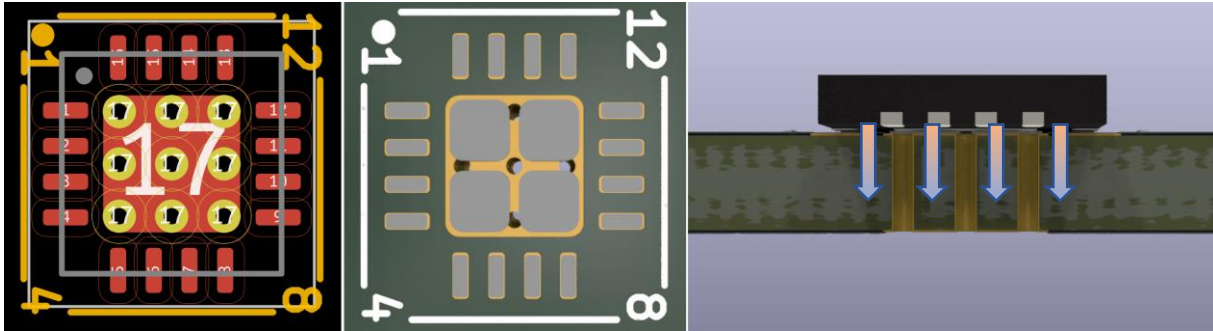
QFN-16 footprint (left), corresponding PCB view (center) and a cutaway of the PCB showing the thermal vias and the direction of heat transfer.
